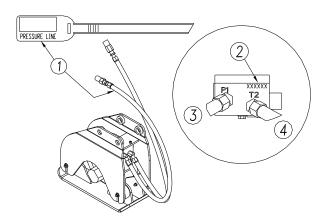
Control Valve Connections 1-Pressure Line I.D. Tag, 2-Valve Part Number, 3-Supply Line (P1), 4-Return Line (T2)
